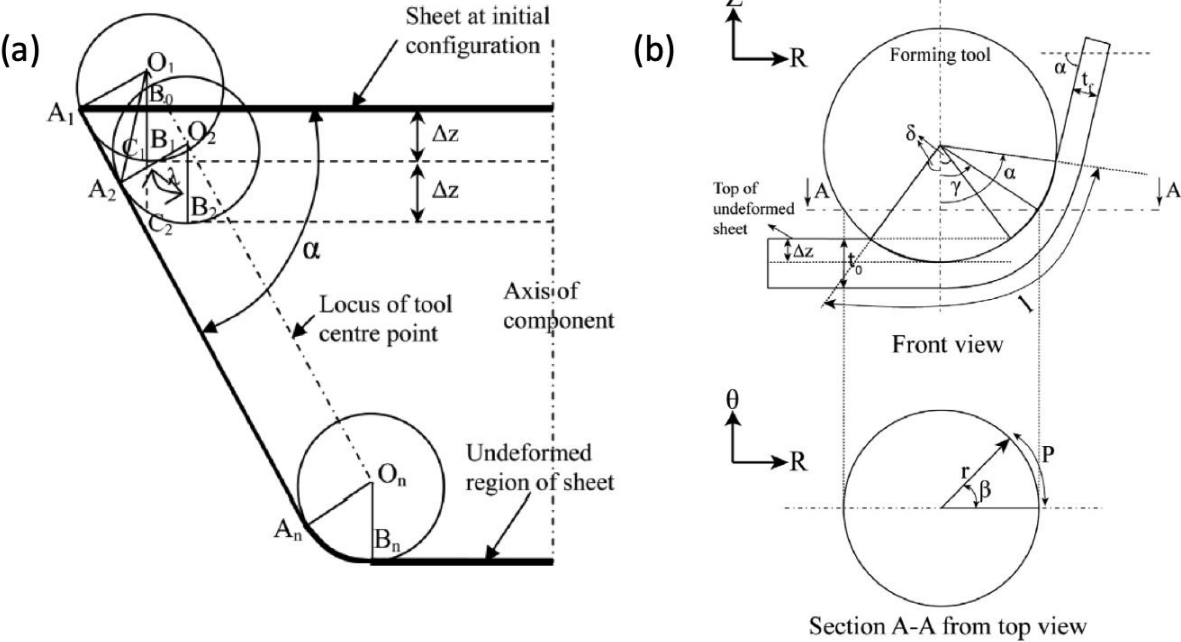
(a) Material and tool movement during ISF of a truncated cone [34] and (b) defining the contact area between the forming tool and sheet. [35] Δz = step size, α = forming angle, t_0 = initial sheet thickness, t_r = formed sheet thickness, R = forming tool radius.
